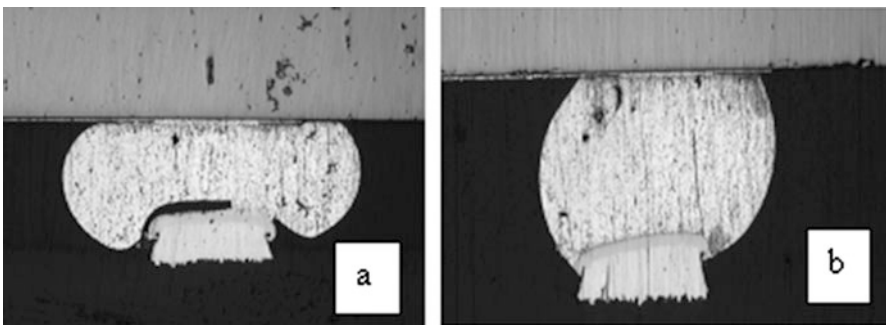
Solder joint cross-sections. (a) Underfill trapping between solder bump and pad. (b) Good bonding between solder bump and pad
